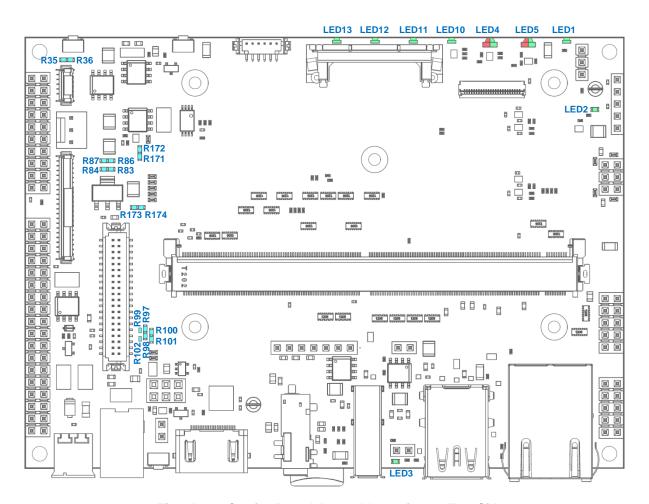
Ixora Carrier Board Assembly Options - Top Side
